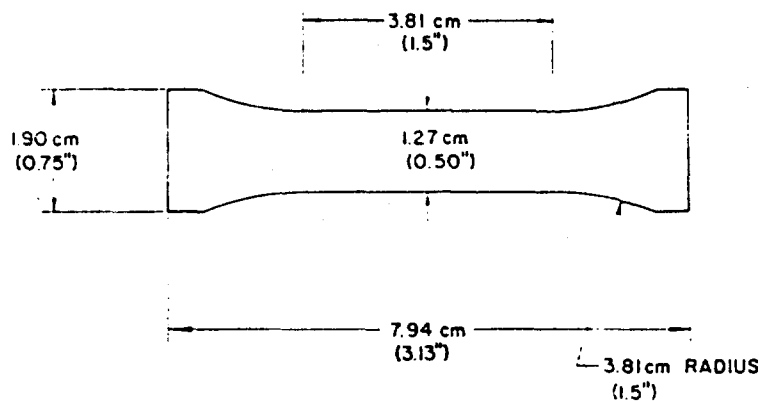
Compression Test Specimen for Materials Less than 3.2 mm Thick
